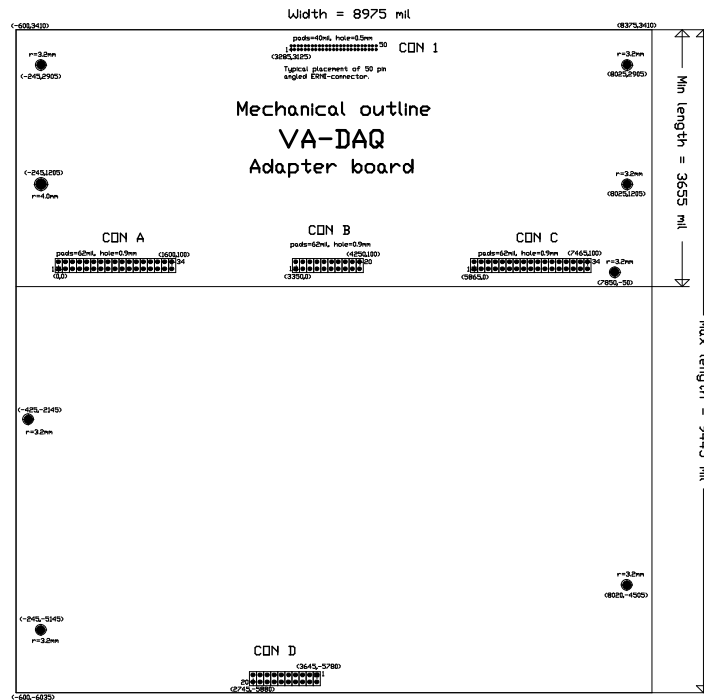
Mechanical outline of VA-DAQ Adapter boards.
